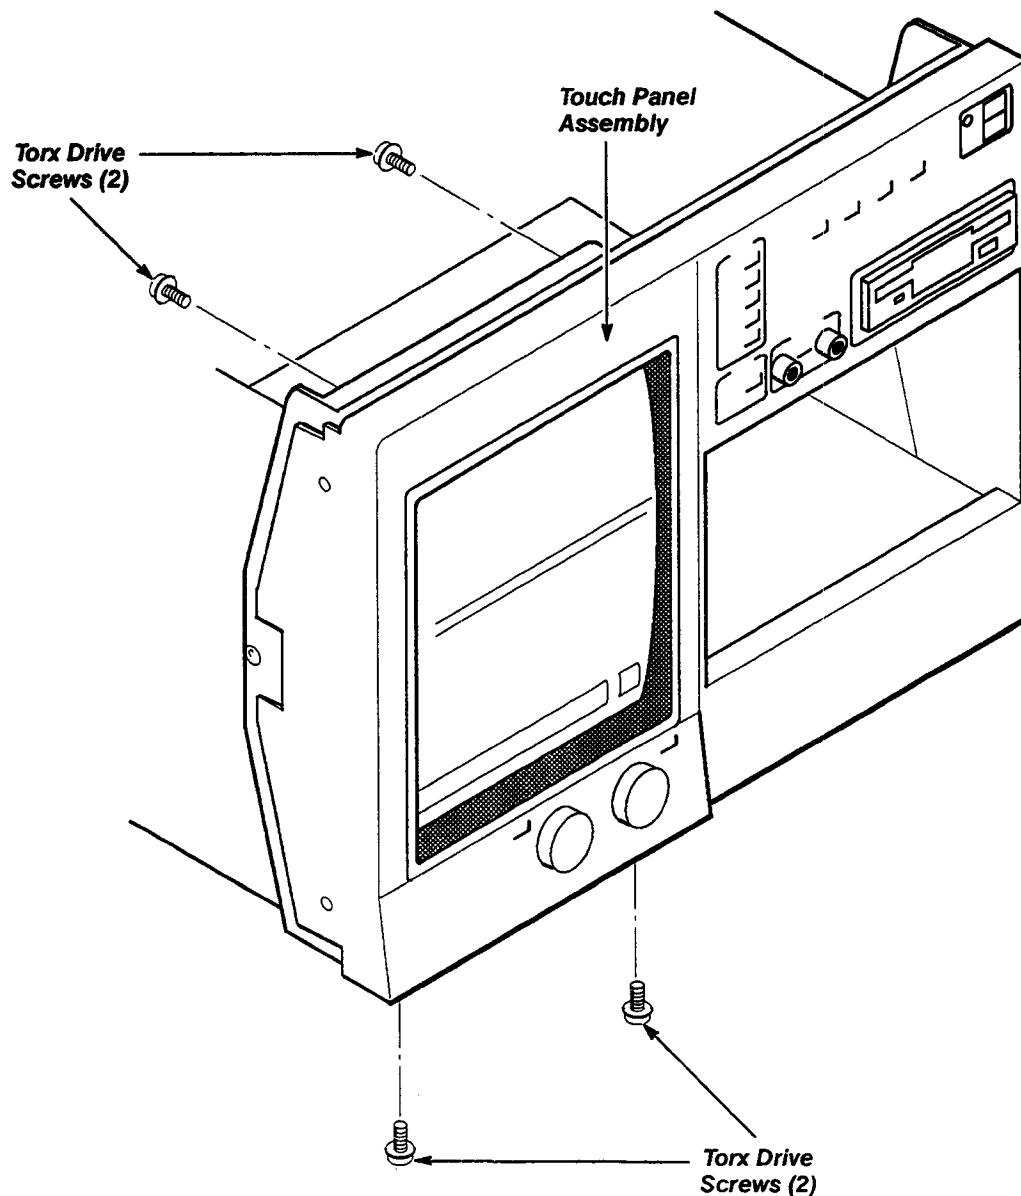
Removing/Replacing the A9 Touch Panel Assembly Torx Drive Screws
